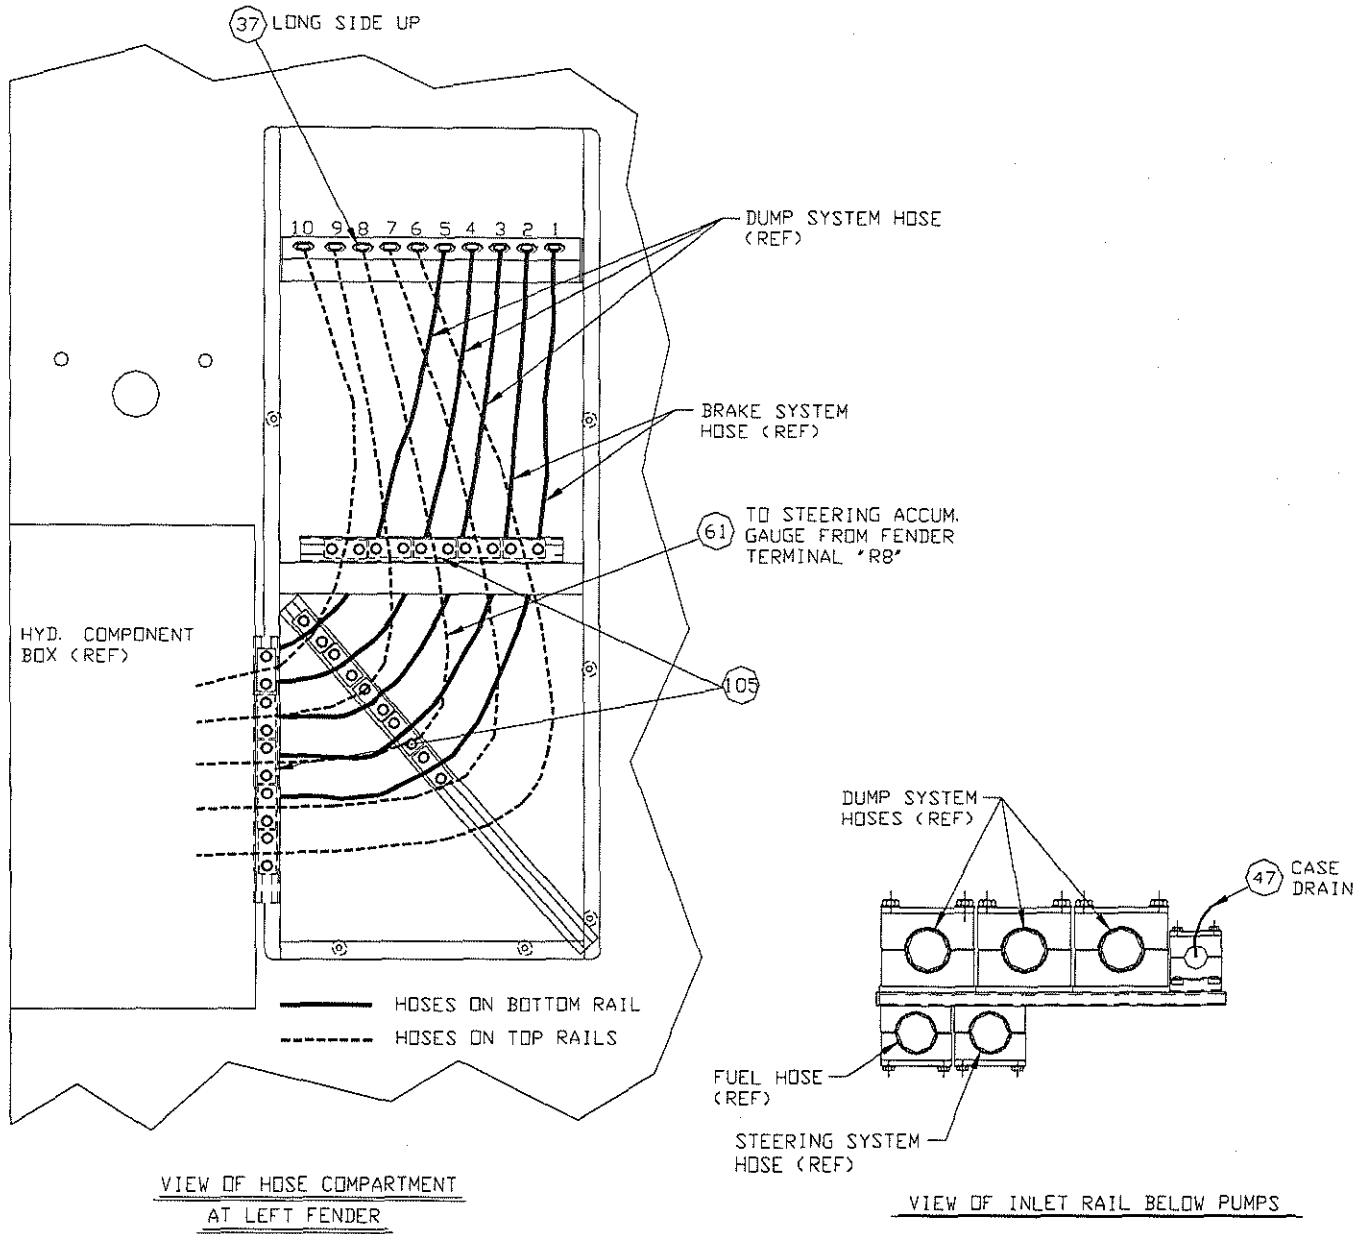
STEERING SYSTEM ASSEMBLY (A85180, SHEET 8 OF 9)
